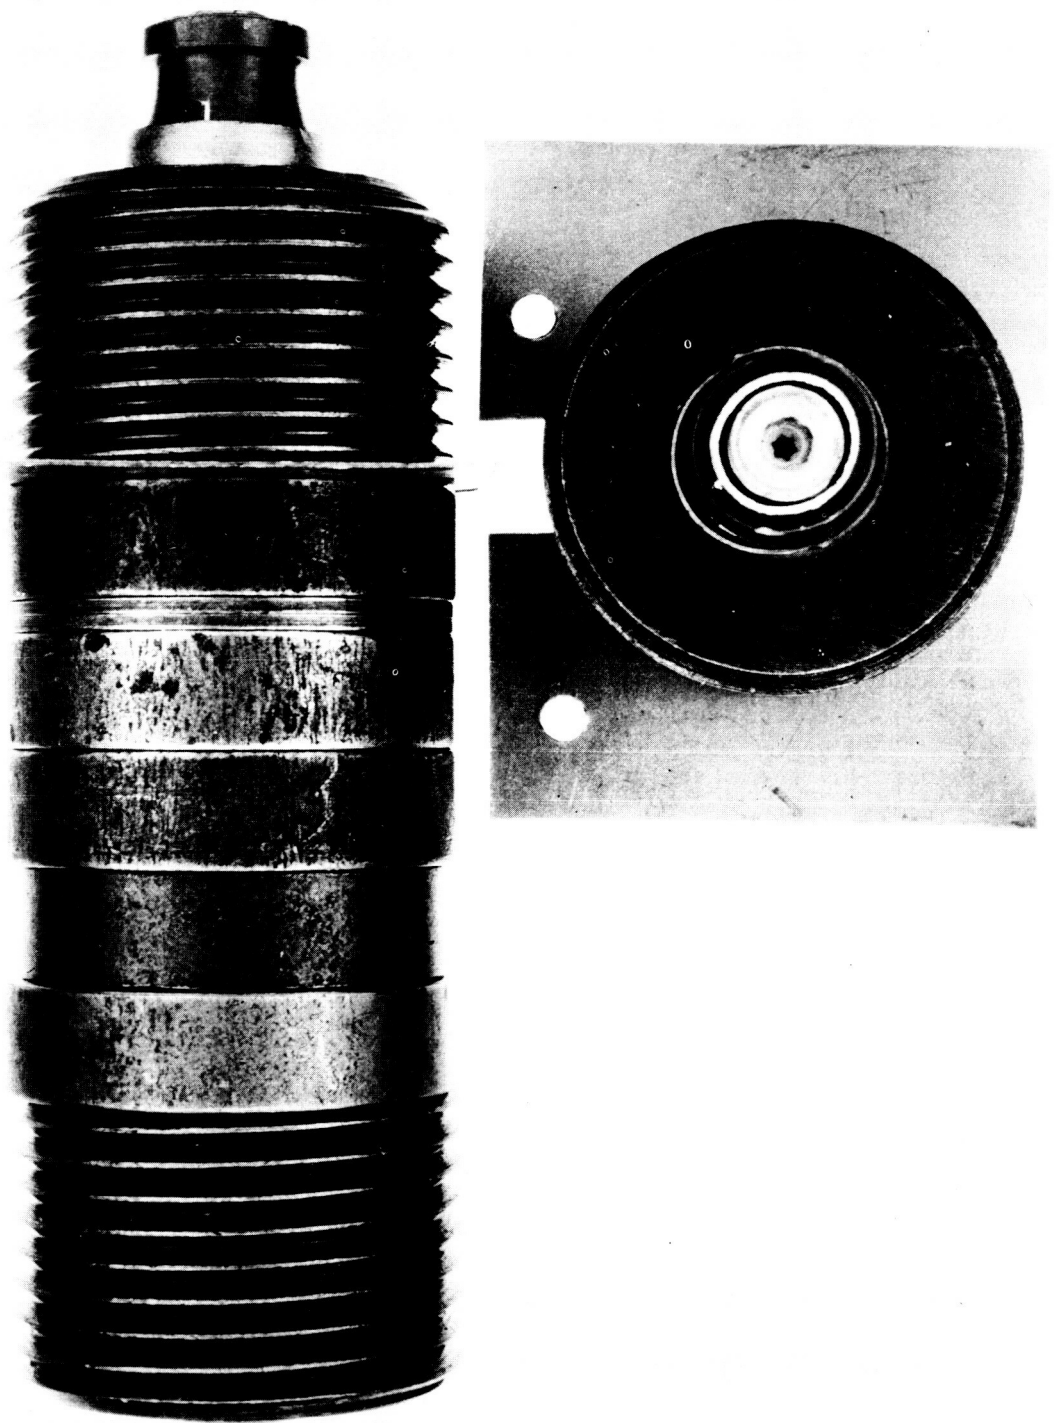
Tensile Test Fixture for Point Drive and Jo Bolts
